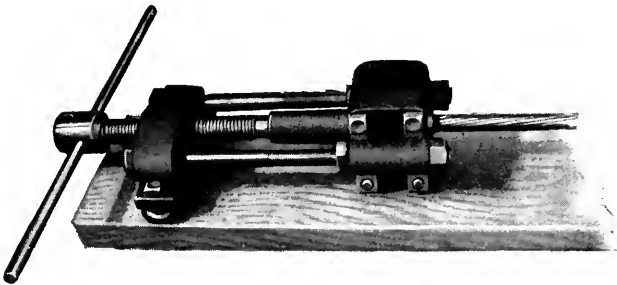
Press for attaching Coupling Sockets to Track Cables.
